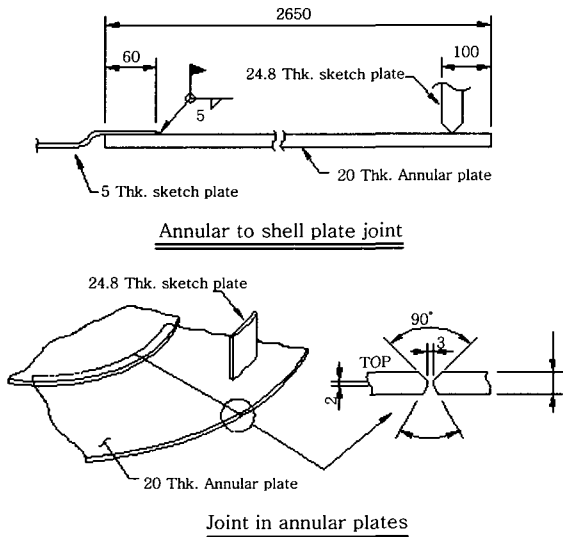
shape of weld joint for annular⁷⁾
